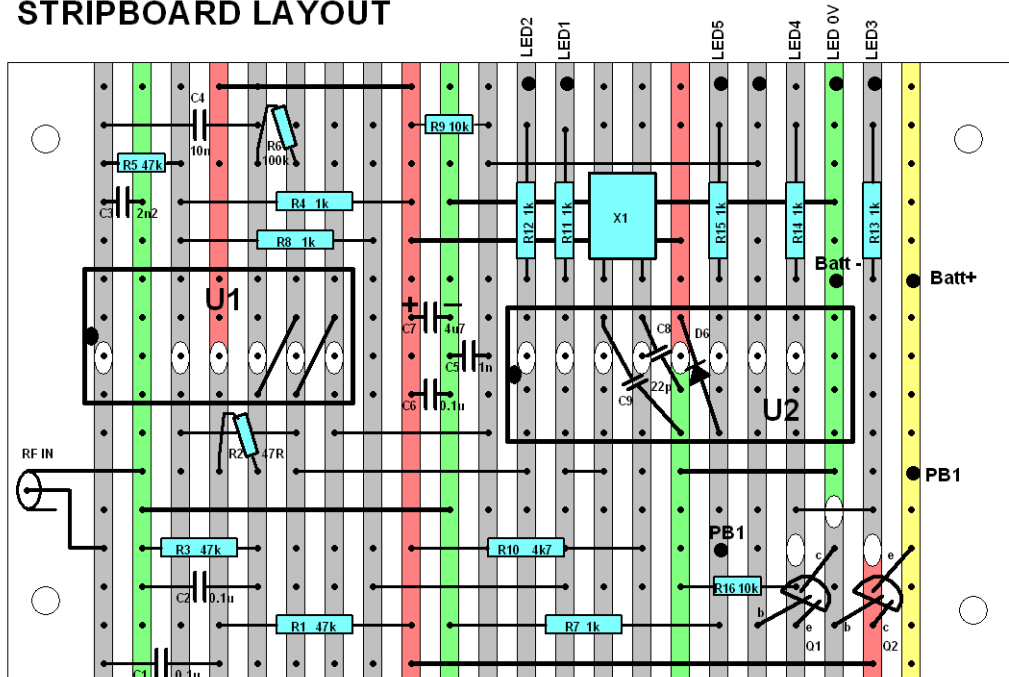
Layout Plan using 16 x 22 matrix stripboard
